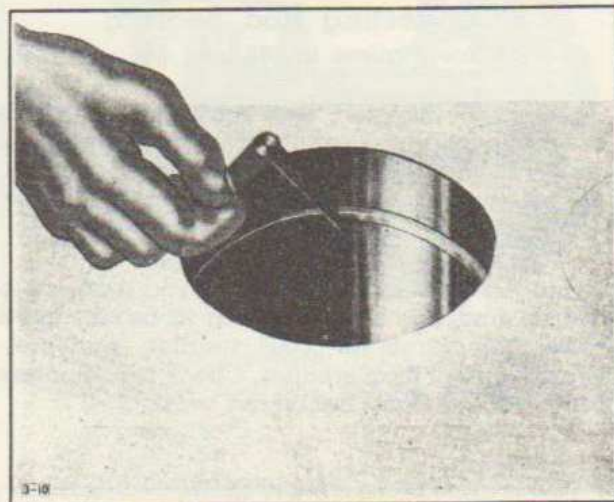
Checking Piston Ring Gap Clearance with Feeler Gage
